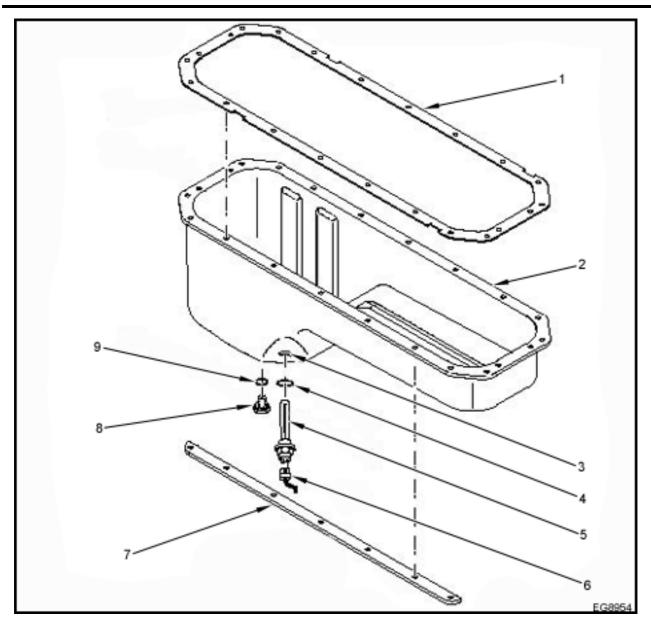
NGV rear sump oil pan (with heater installation) and related parts
